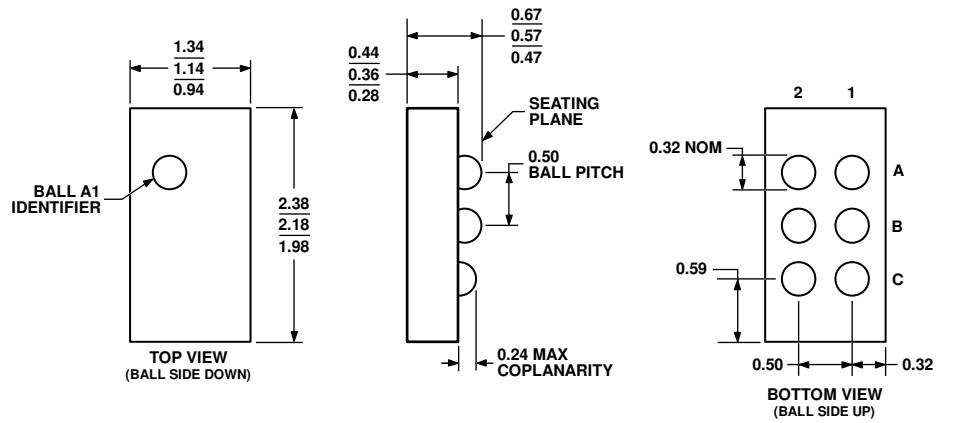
6-Ball Wafer Level Chip Scale Package [WLCSP]
